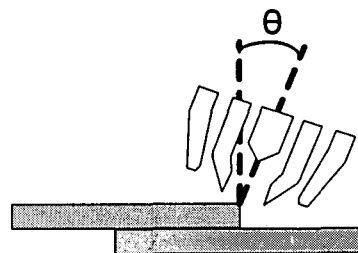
Schematic of experimental set up for plasma arc welding
